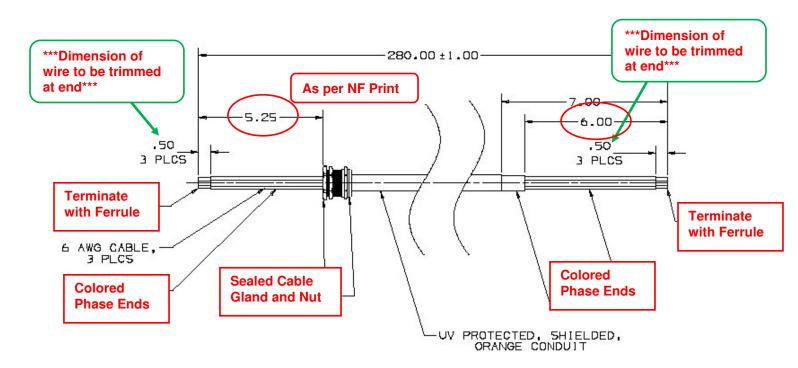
Wire preparation for ferrules, PN: 463820 HVAC Cable Assembly.
